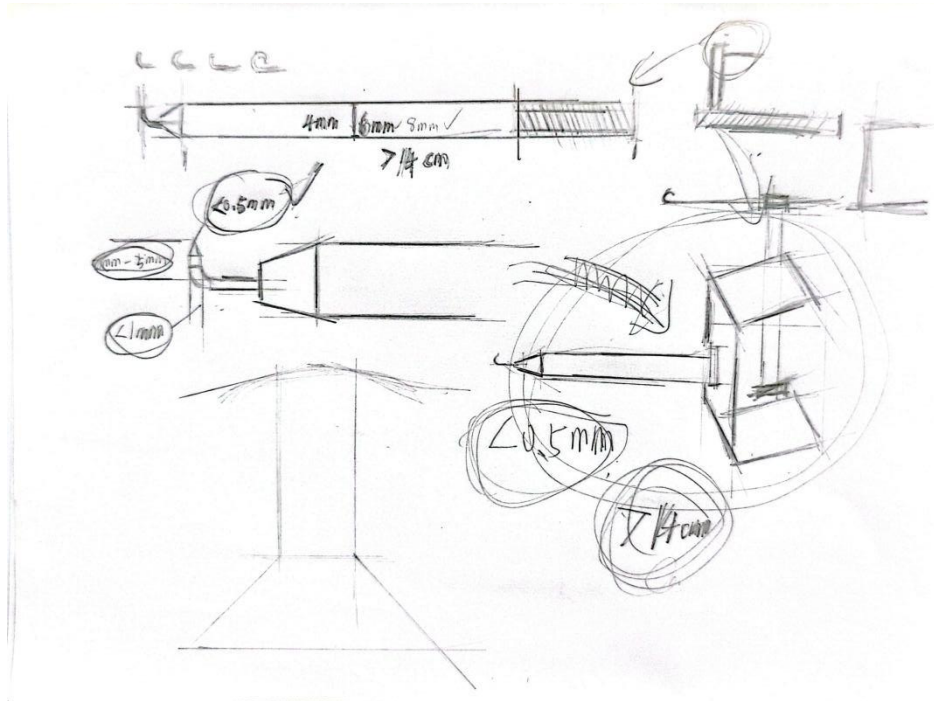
Improved crochet tool design sketch (Gao, 2025)
